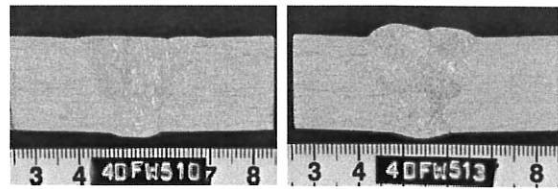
Macrostructure of DW-329AP one-sided weld joints in flat welding (left) and vertical-up welding (right) with ceramic backing and 80%Ar-20%CO₂ shielding.
